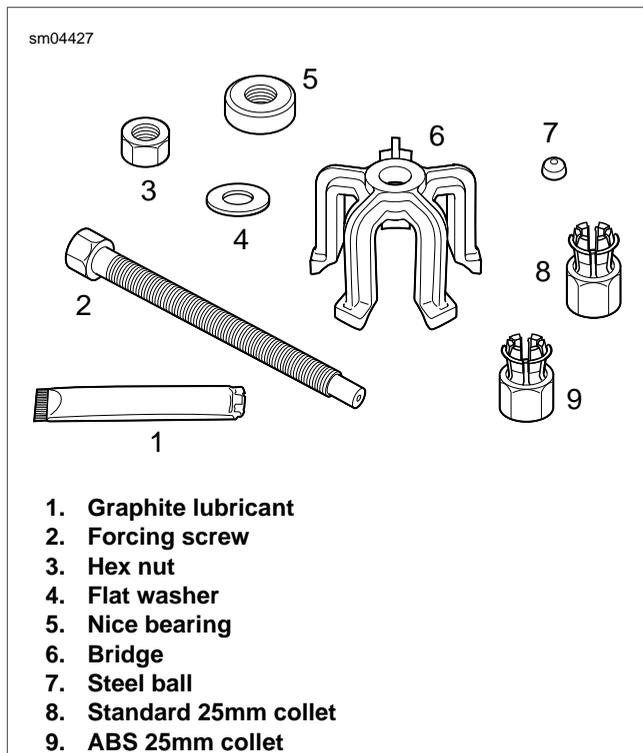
Wheel Bearing Remover Tools (HD-44060B)
